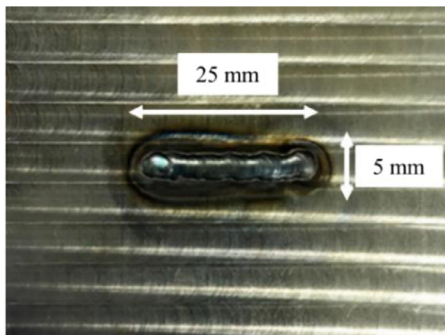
Weld seam on the mild steel work coupon (top view).
